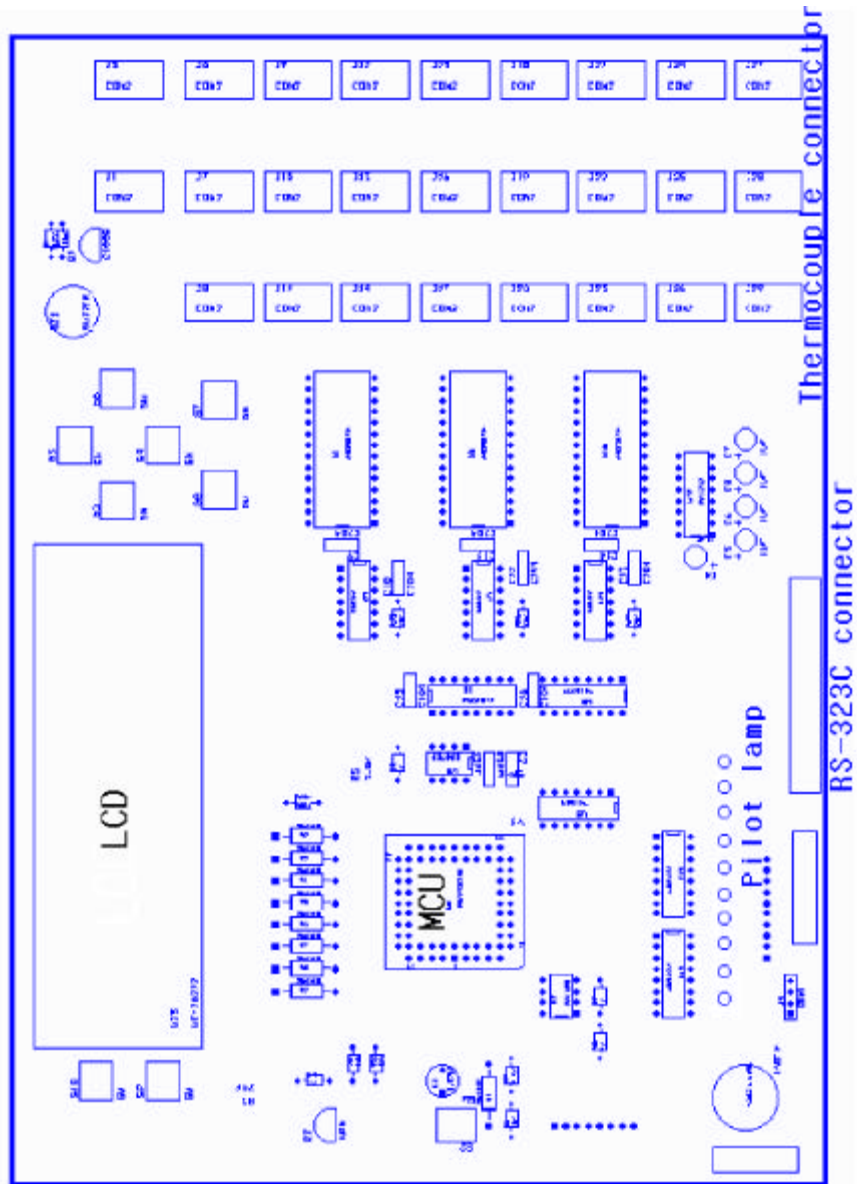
Assembly layout of the components for the PCB of food machine controller
